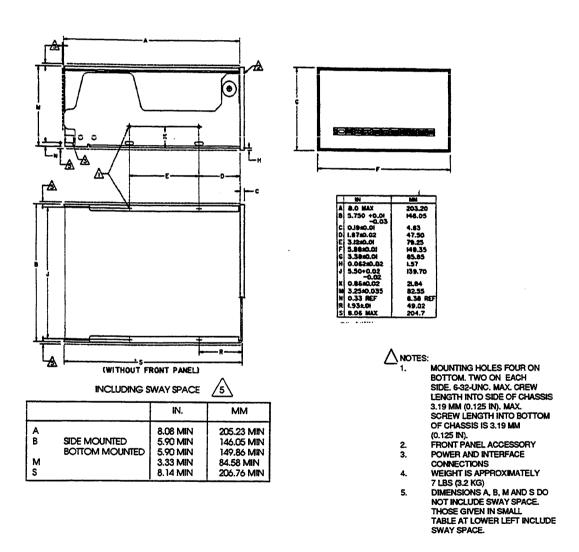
MOUNTING CONFIGURATION DIMENSIONS
